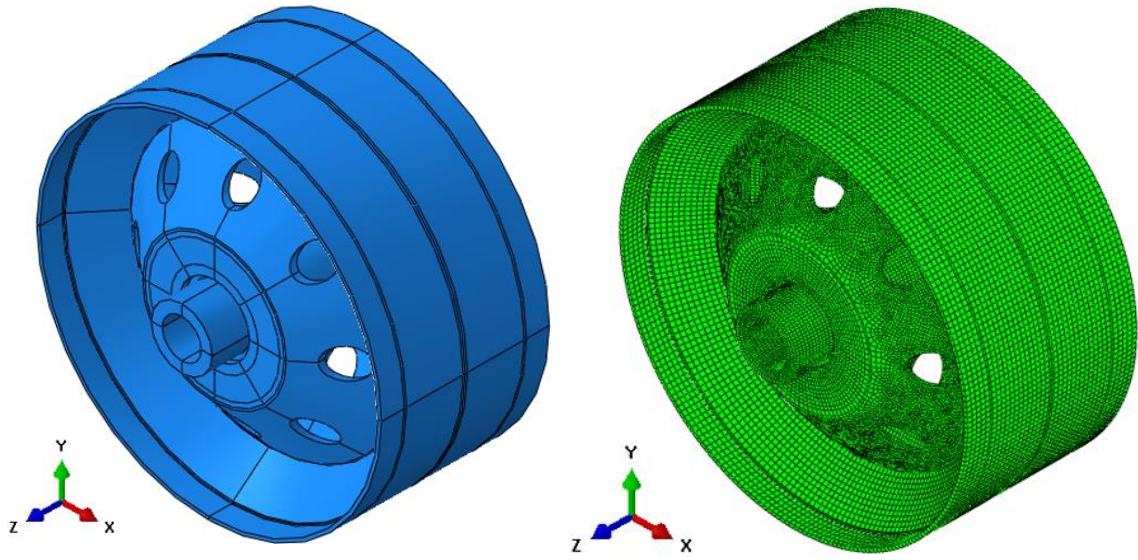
Complete assembly without and with mesh ( 88 000 elements).
